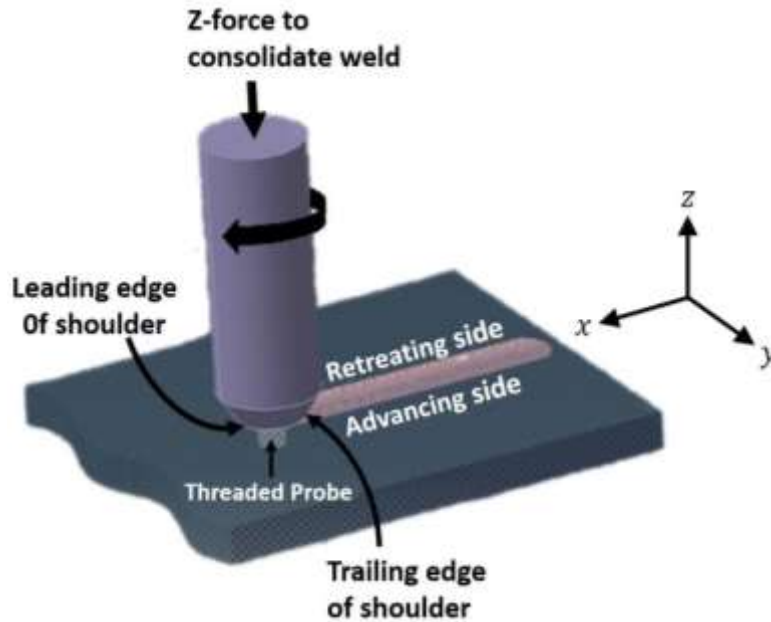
Depiction of the linear friction stir welding process for a butt weld including the conventional axis-directions.
